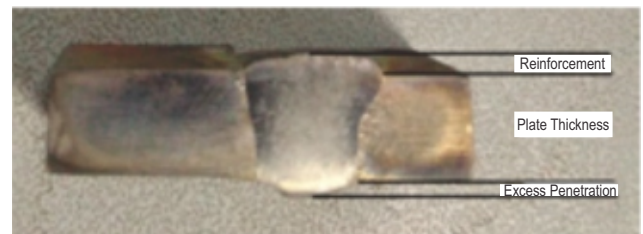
Typical representation of excessively penetrated weld joint
